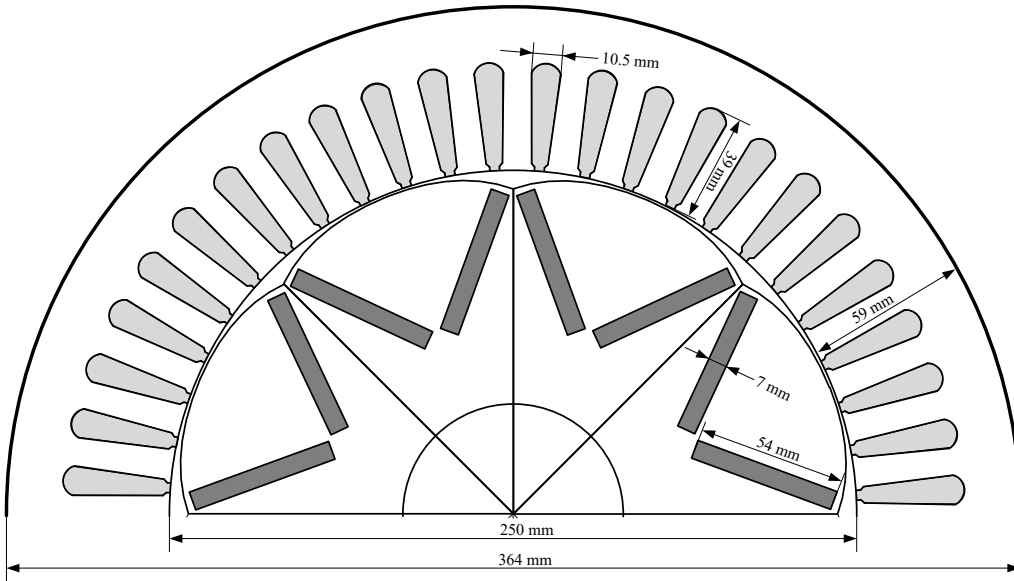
Geometrical dimensions of the dual three-phase PMSM.
